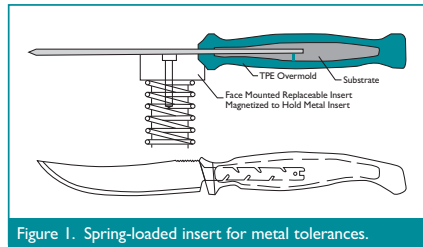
Spring-loaded insert for metal tolerances.
